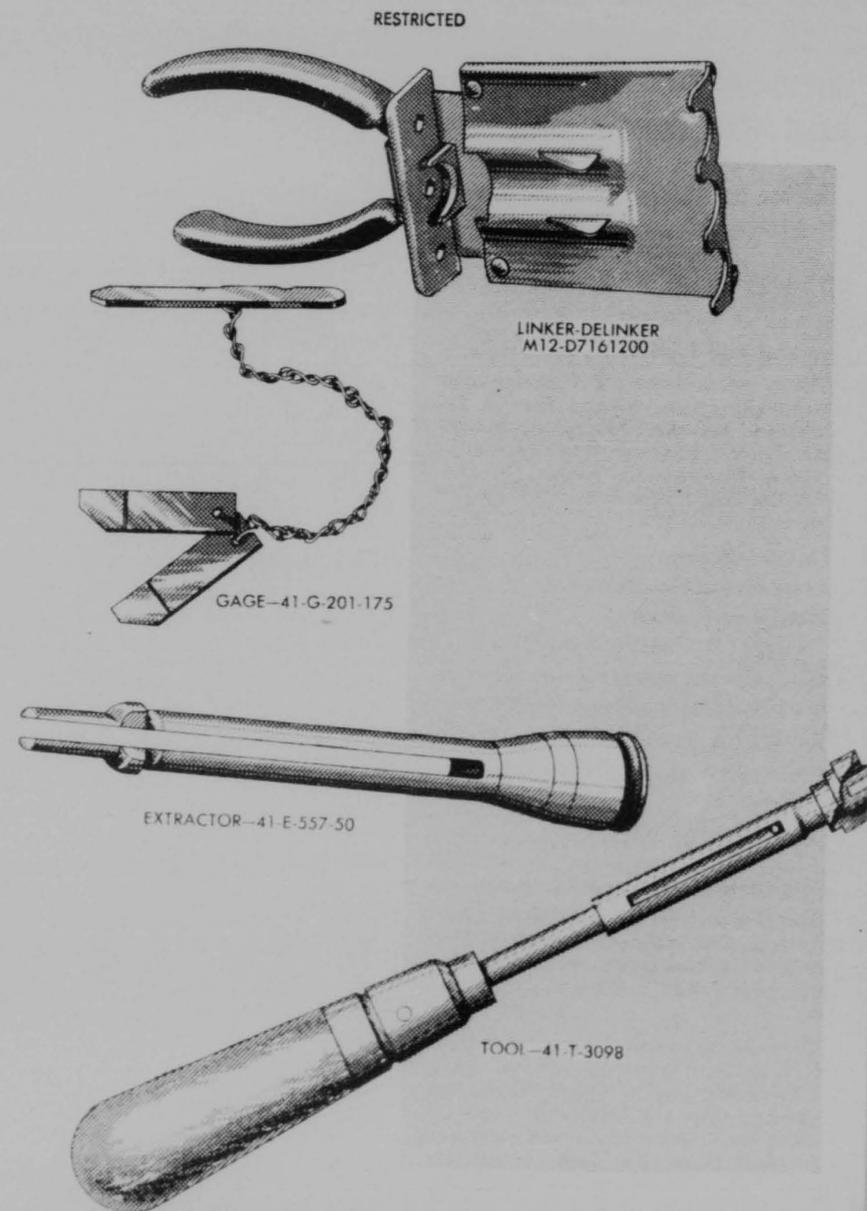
Ruptured Cartridge Extractor, Cal. .50 and Firing Pin Spring Removing Bolt.
